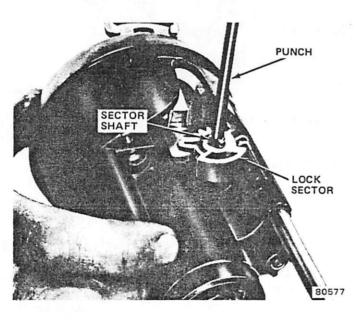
J-56 Lock Sector and Sector Shaft Removal
